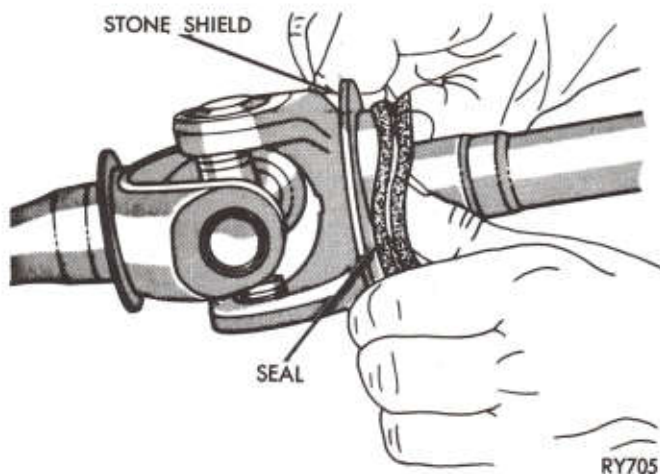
Installing Lip Seal on Axle Shaft Stone Shield
